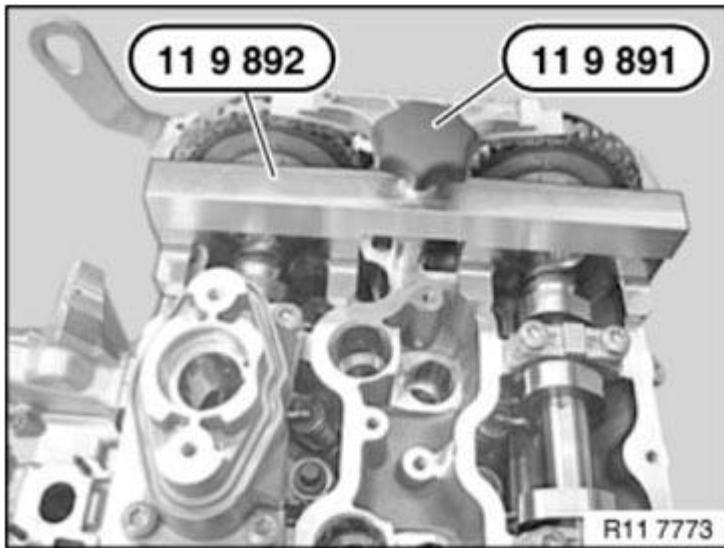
Positioning Special Tool 11 9 892 On Special Tool 11 9 893
